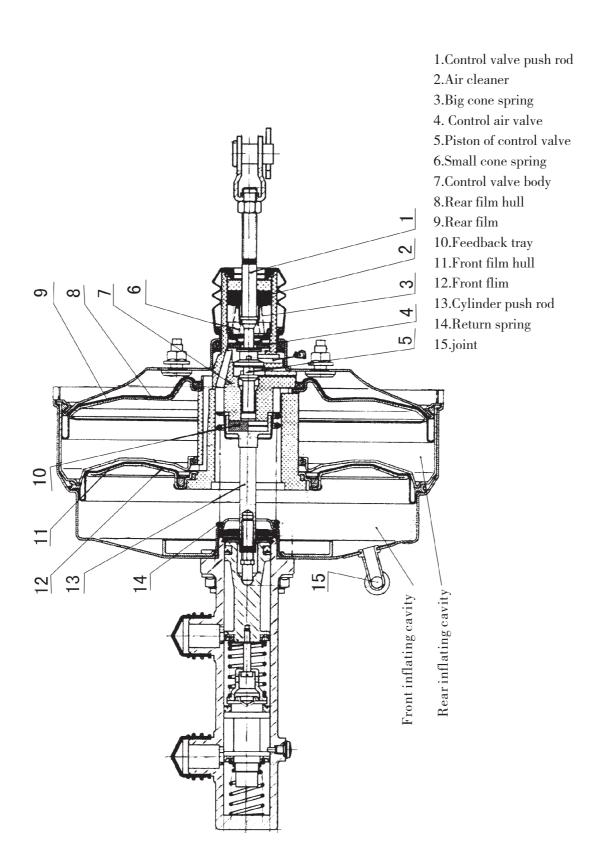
Vacuum booster and main brake cylinder constructure
